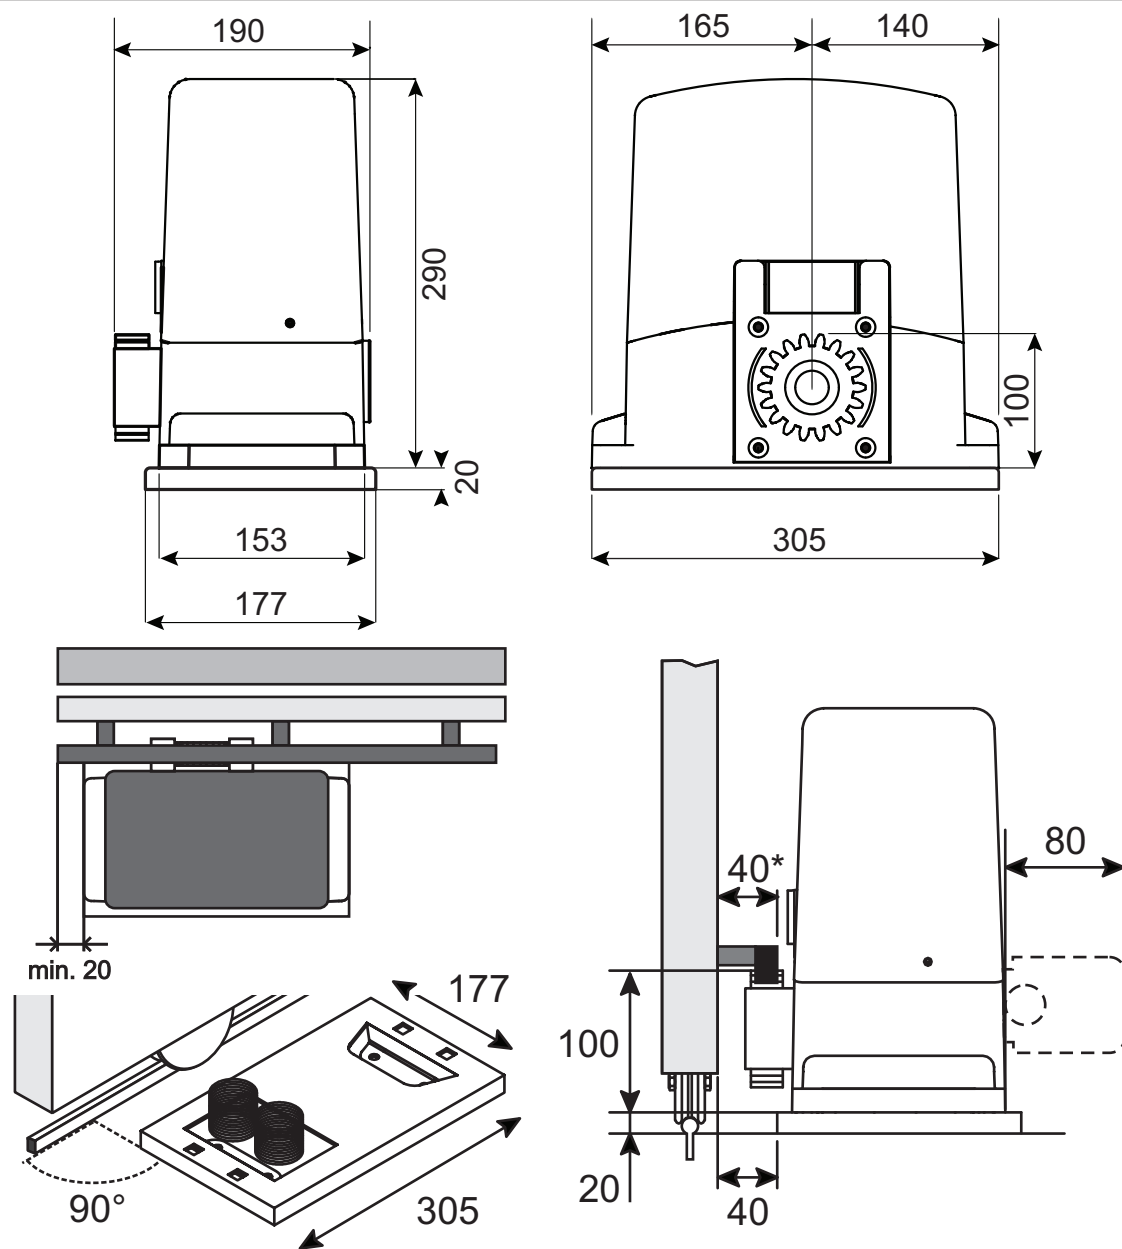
Drive dimensions and recommended assembly dimensions (mm).
